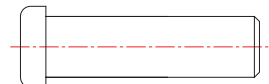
The spindle drawing saved as Fig13.dwg
